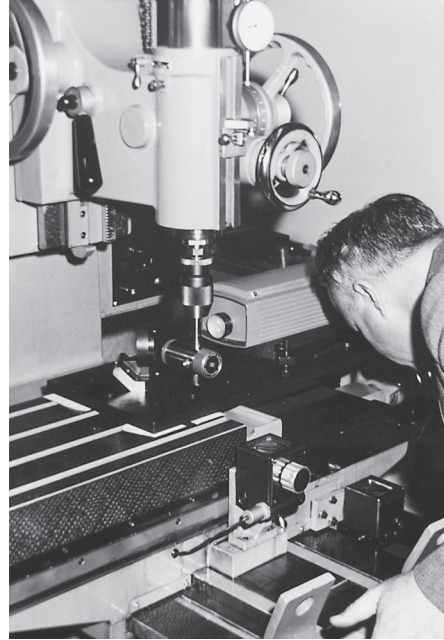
Laser interferometer checking the measuring system on a jig boring machine (Courtesy of Renishaw).
